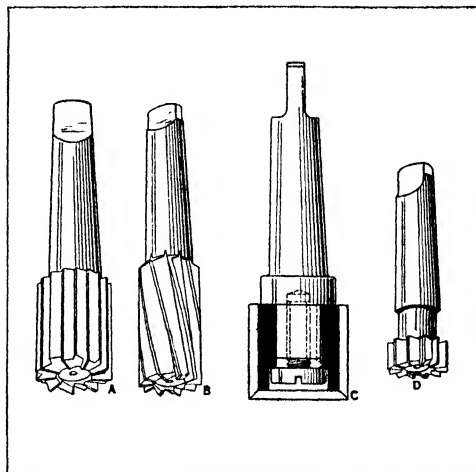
END MILLS. (A) WITH STRAIGHT TEETH. (B) WITH SPIRAL TEETH. (C) HOLDING SHELL CUTTER ON ARBOR WITH SCREW AND KEY. (D) T-SLOT CUTTER
